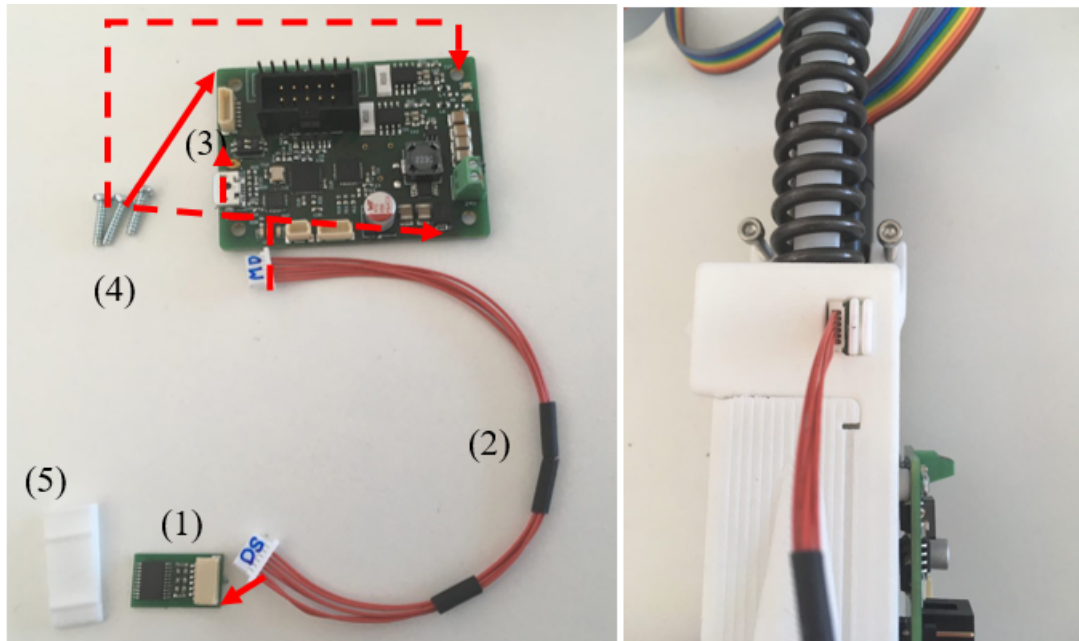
Mounting of the displacement sensor on the muscle unit and cabling to the motor driver board.
